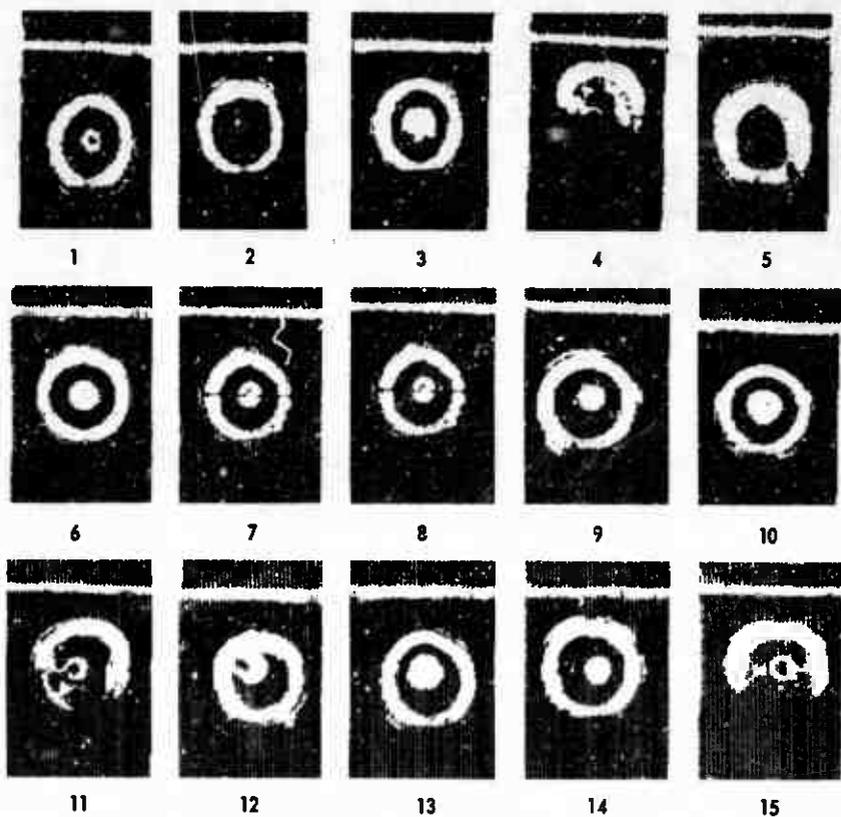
C-Scan Record of Series 6 Welds.
